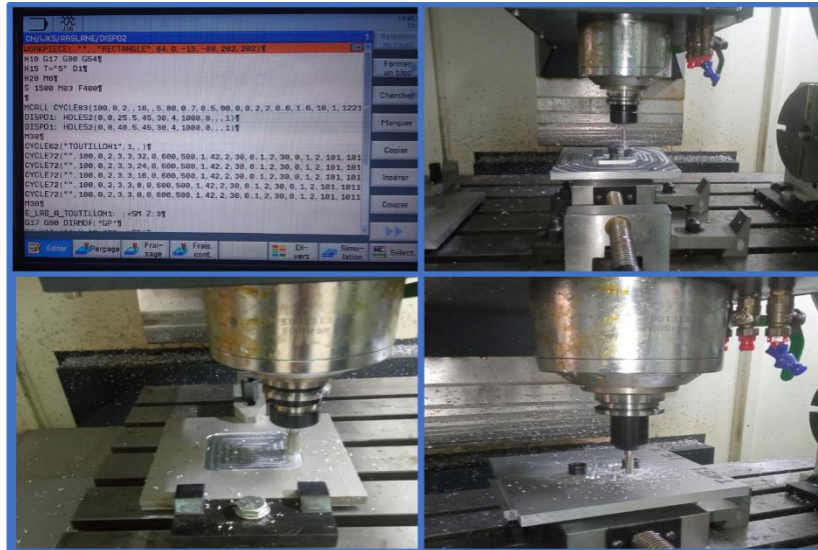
CNC Control Panel Displaying G-Code and Real-Time Machining Process.
